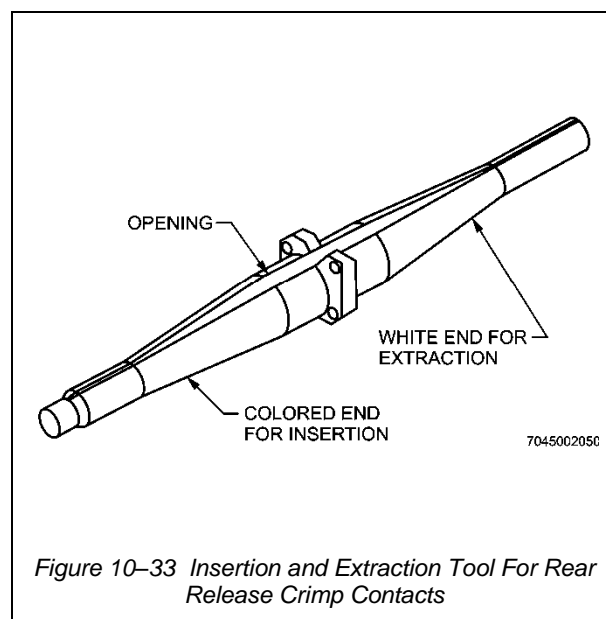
Insertion and Extraction Tool For Rear Release Crimp Contacts
